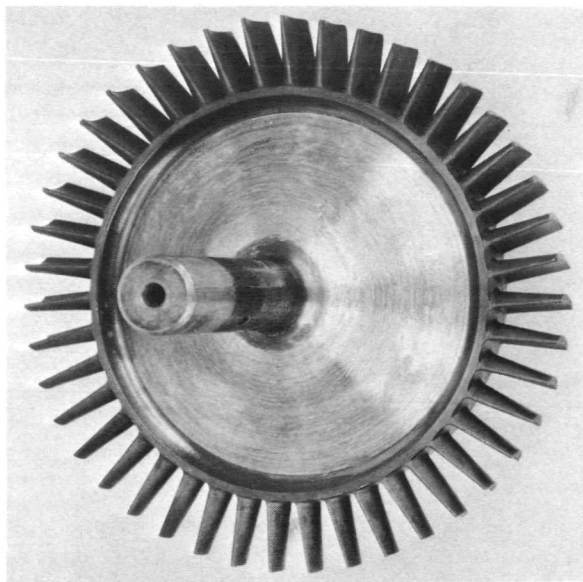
Bimetal turbine-wheel configuration for electron-beam welding.
